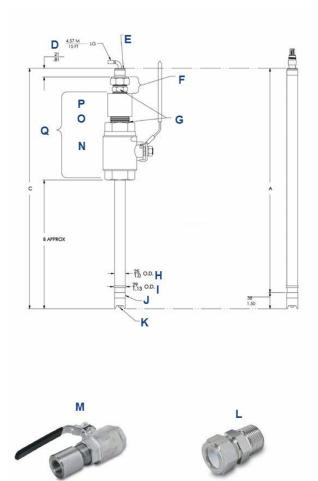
Rosemount 3400HT Sensor Dimensional Drawing (with and without 1½-in. Ball Valve Assembly)
